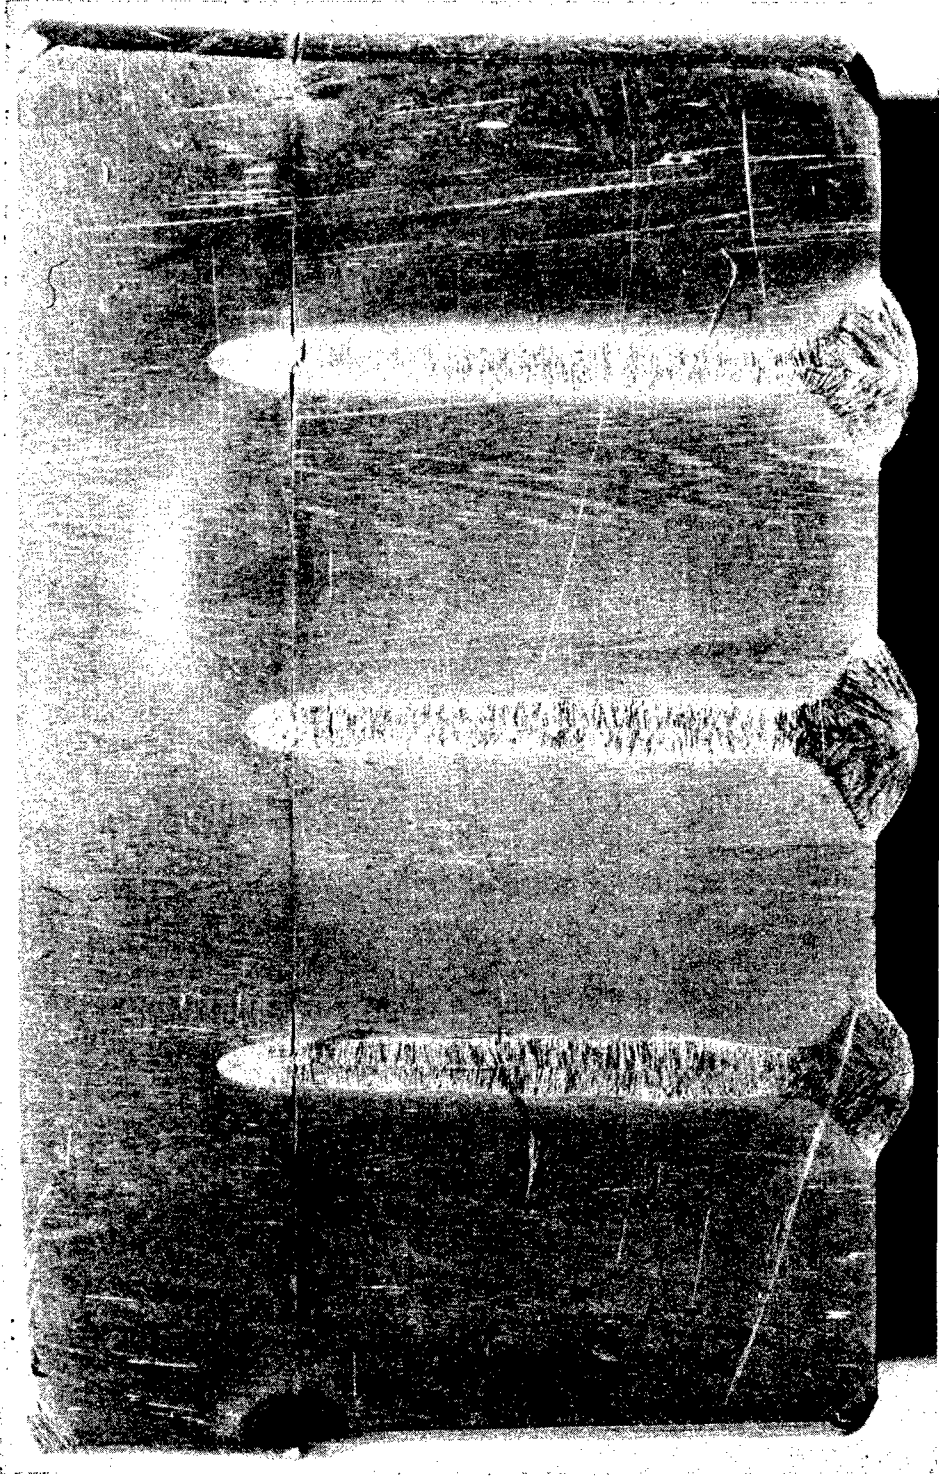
Parameter Test Block, Sciaky Welder.
